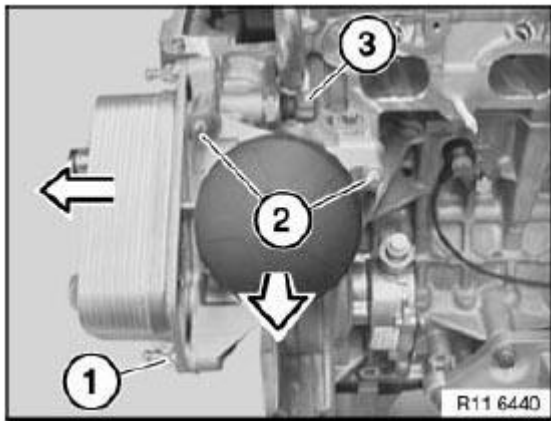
Disconnecting Plug Connection Of Oil Pressure Switch
